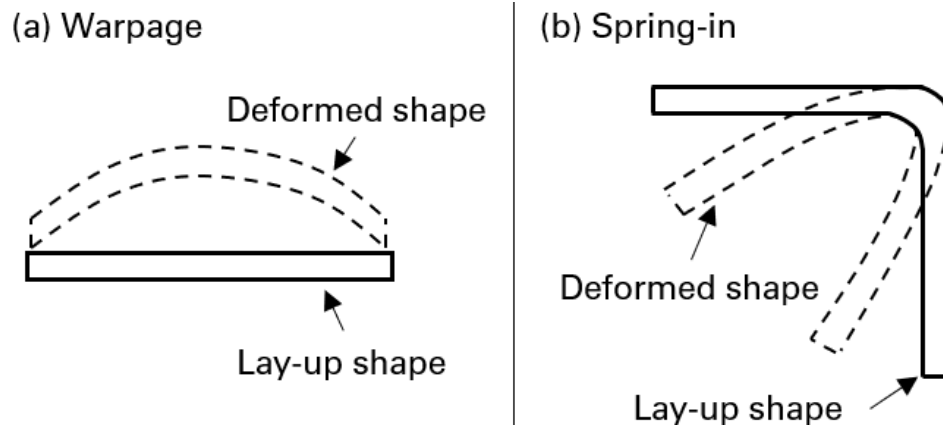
(a) Warpage of flat parts (b) spring-in of curved parts.
